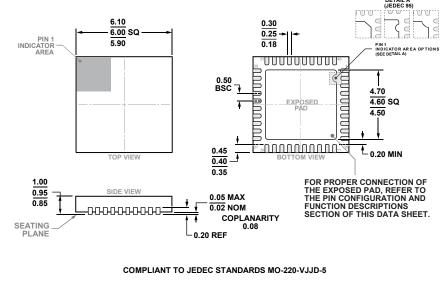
40-Lead Lead Frame Chip Scale Package [LFCSP] 6 mm \times 6 mm Body and 0.95 mm Package Height (CP-40-15) Dimensions shown in millimeters
